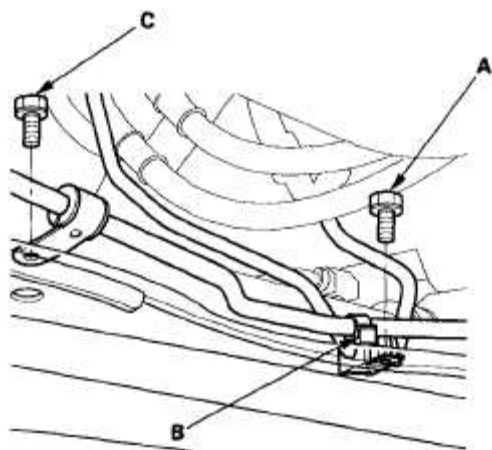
Identifying Inlet Line Clamp Bolt And Return Line Clamp Bolt
